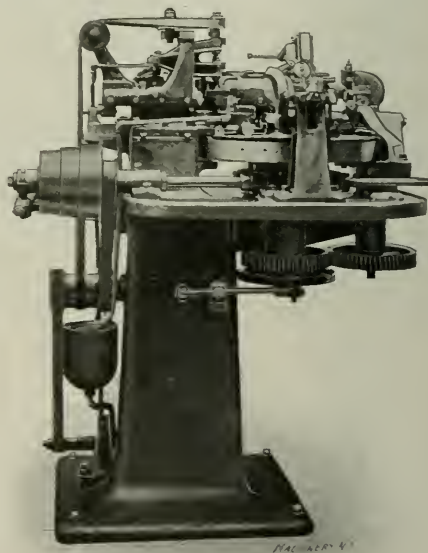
Langelier Needle-making Machine, Magazine Side.
